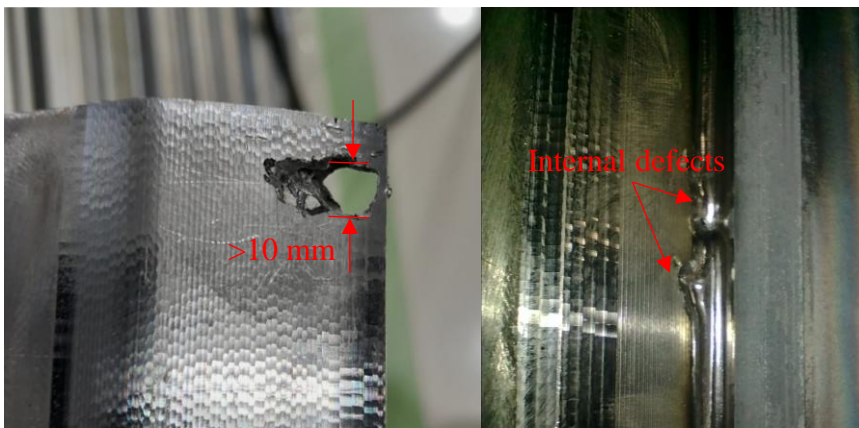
Internal defects detected in machining and HFMI treatment.
